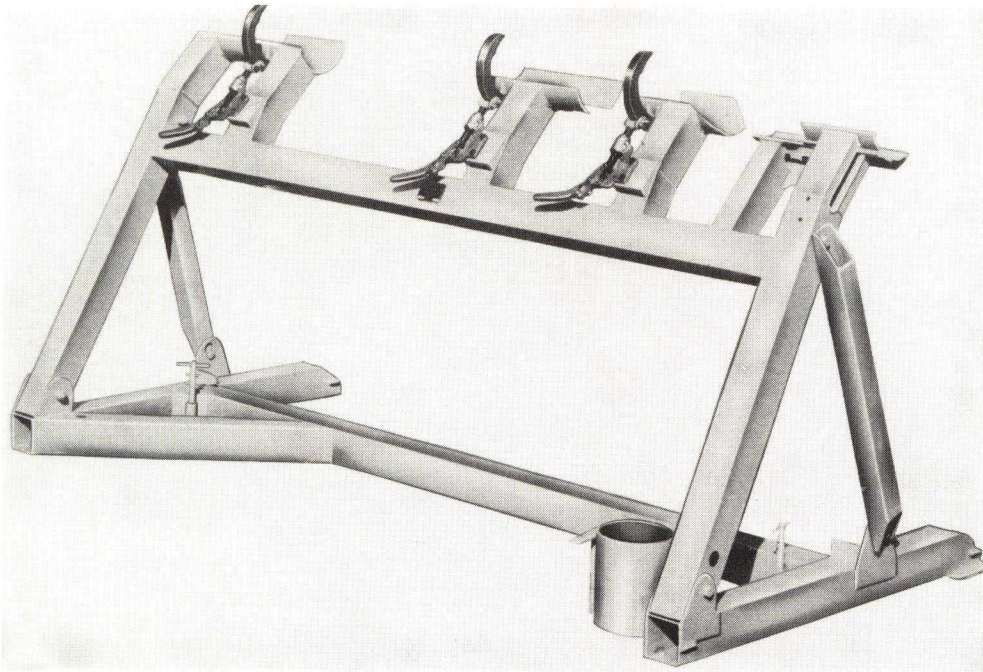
SIDEWINDER Assembly Jig Set Up for Use.
